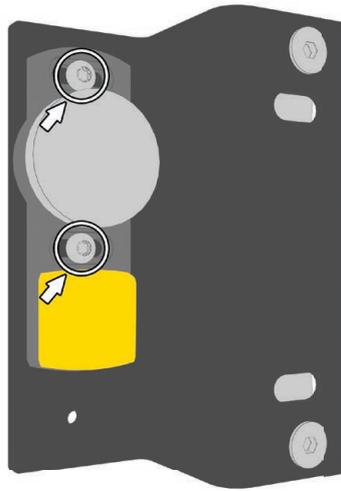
Attach the anchor plate to the mounting plate and tighten the Torx screws M6 x 8 mm.
